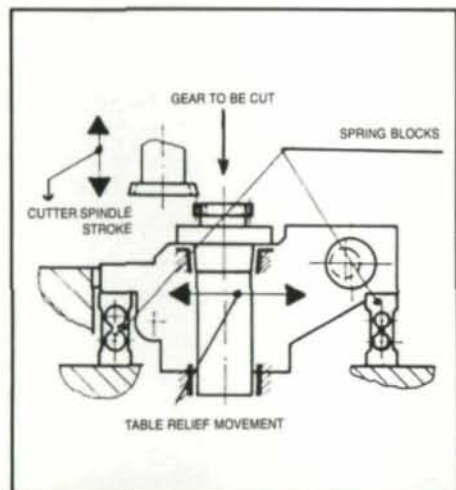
"Old Style" Gear Shapers — Work Table Back-Off System.
